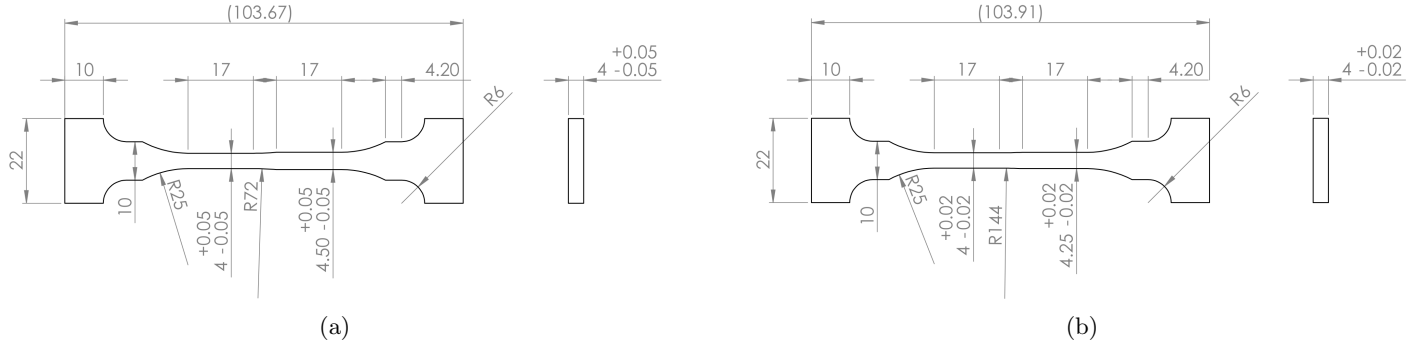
Design of the Double-Section Sample: (a) AISI 304L and (b) AISI 316LN. Dimensions in millimetres.
